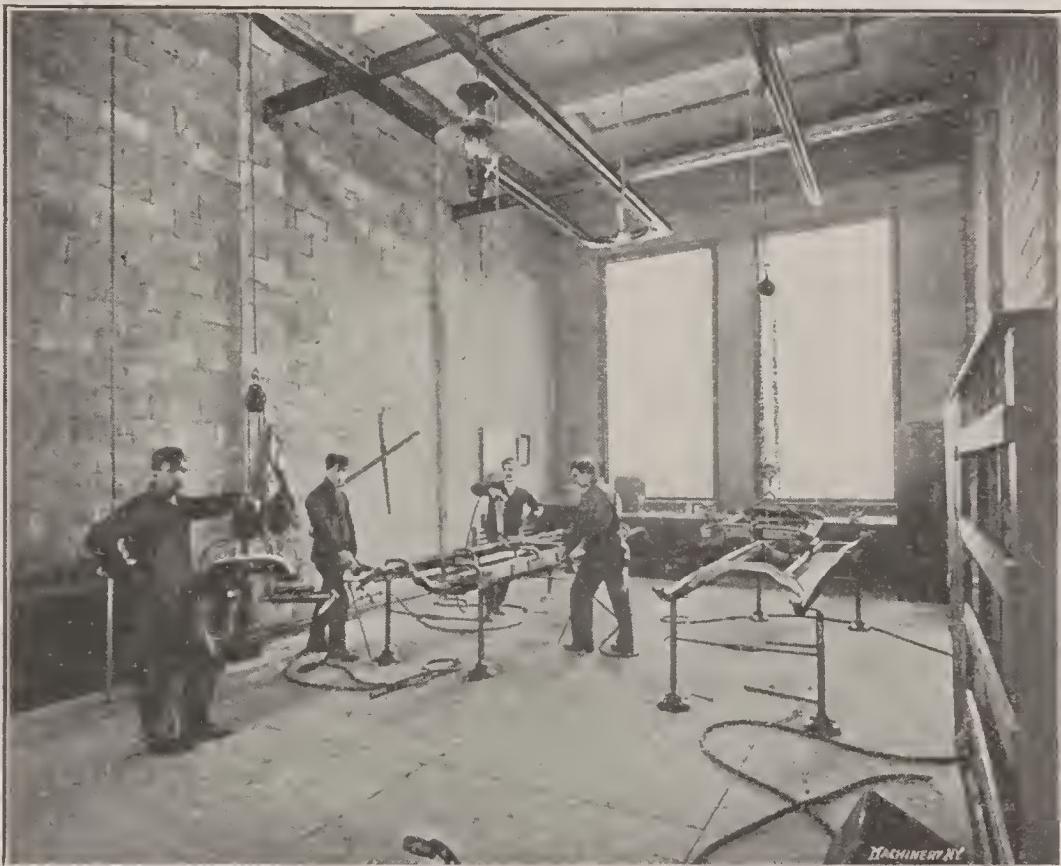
Room in which the Frames are drilled and riveted by Pneumatic Tools
